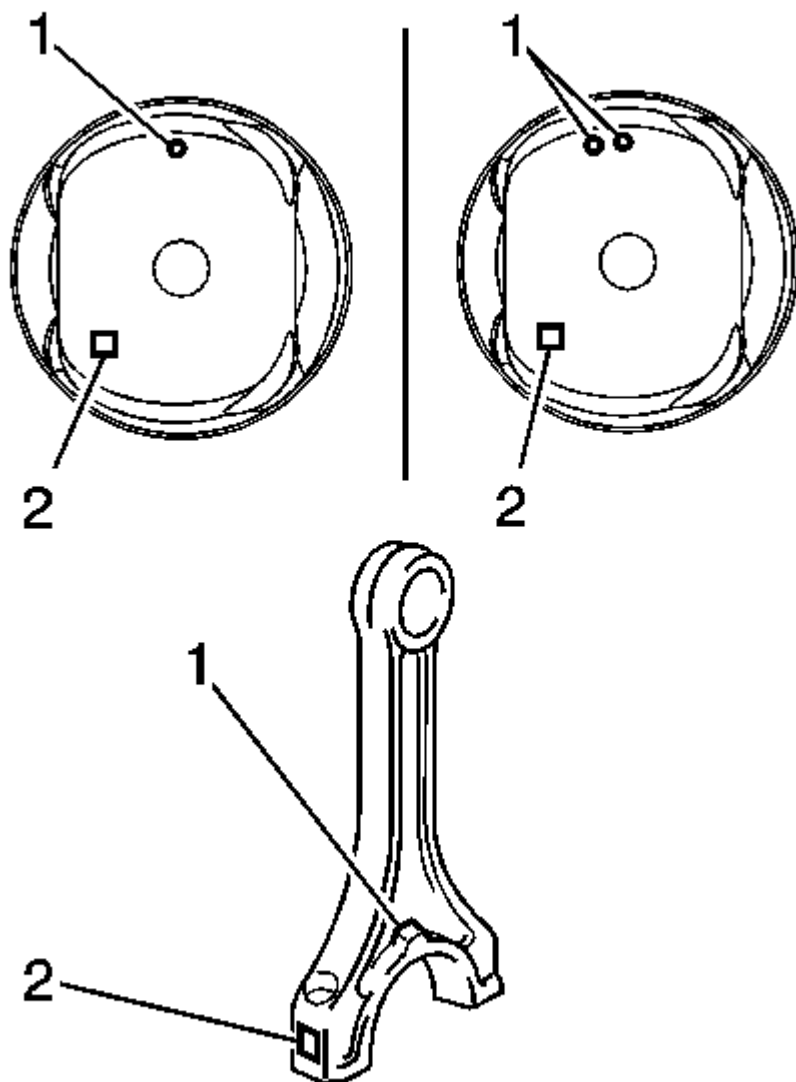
Comparing Piston Pin Diameter & Pin Bore Diameter
